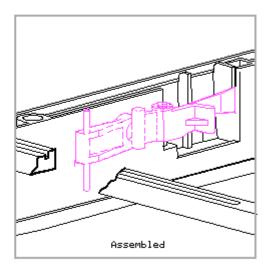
Replacing the Hard Drive Release Latch Assembly
